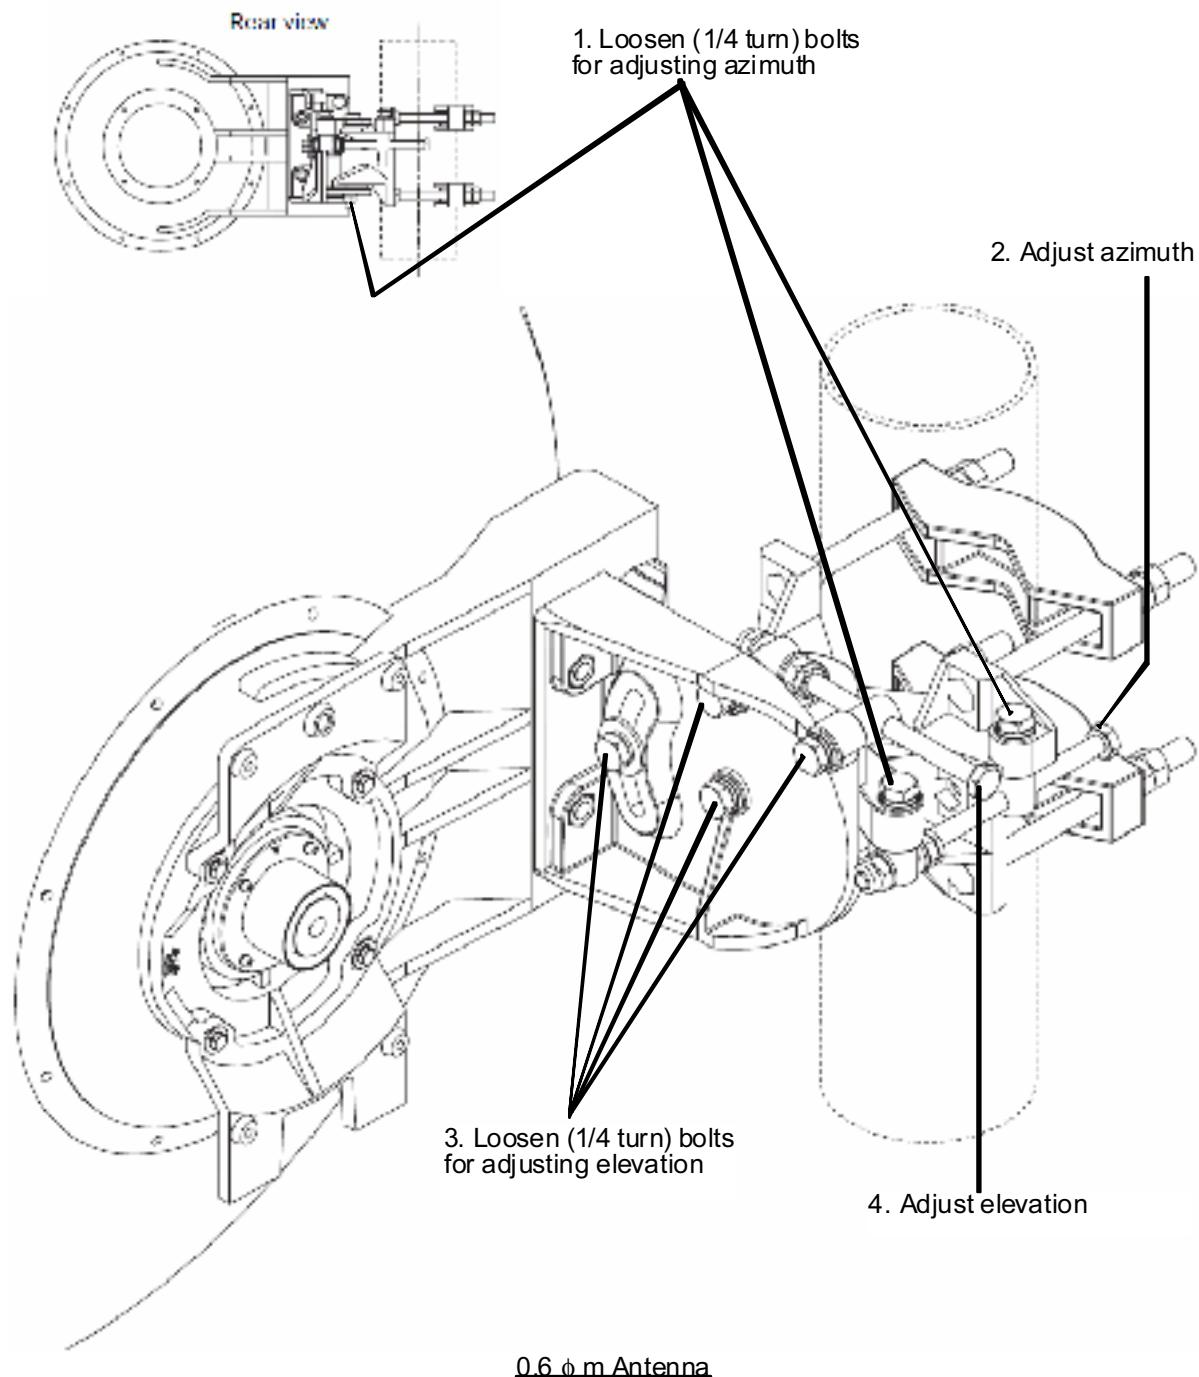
Location of Adjusting Nuts and Bolts (RFS SB1 Type Bracket)
